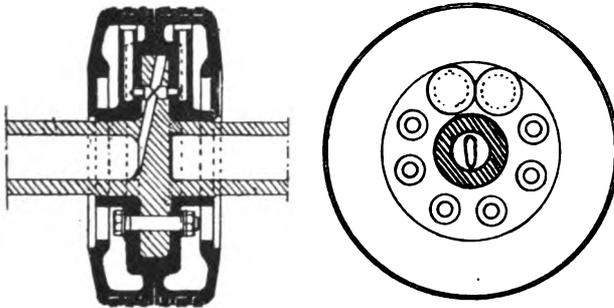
Cockerill Piston and Rod Coupling.
